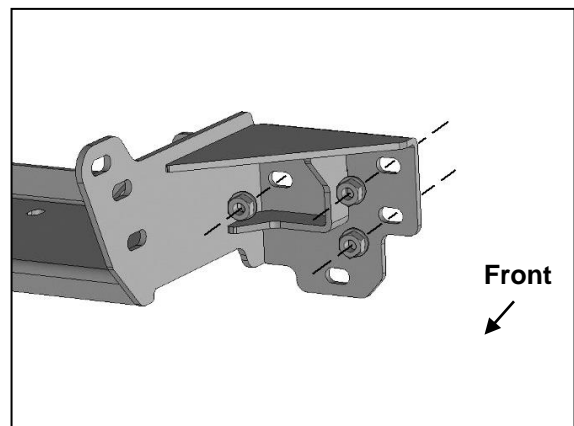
Bolt Plate installed on top of passenger/right side of frame (arrow). Reinstall fender liner
